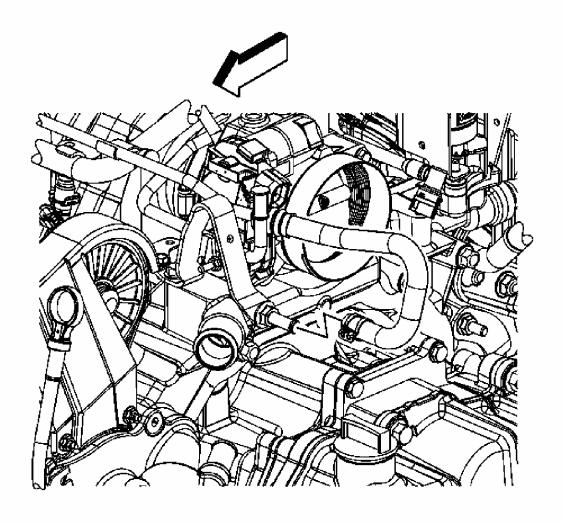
View Of Surge Tank Inlet Hose/Pipe Courtesy of GENERAL MOTORS CORP.
